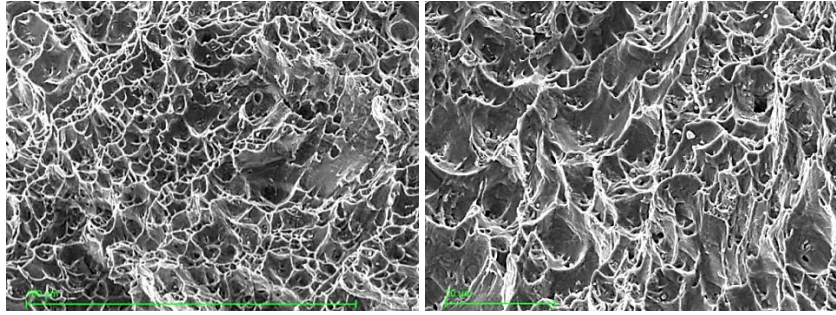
SEM images showing the ductile fracture surface on the Alloy 182 buttering layer specimens.
